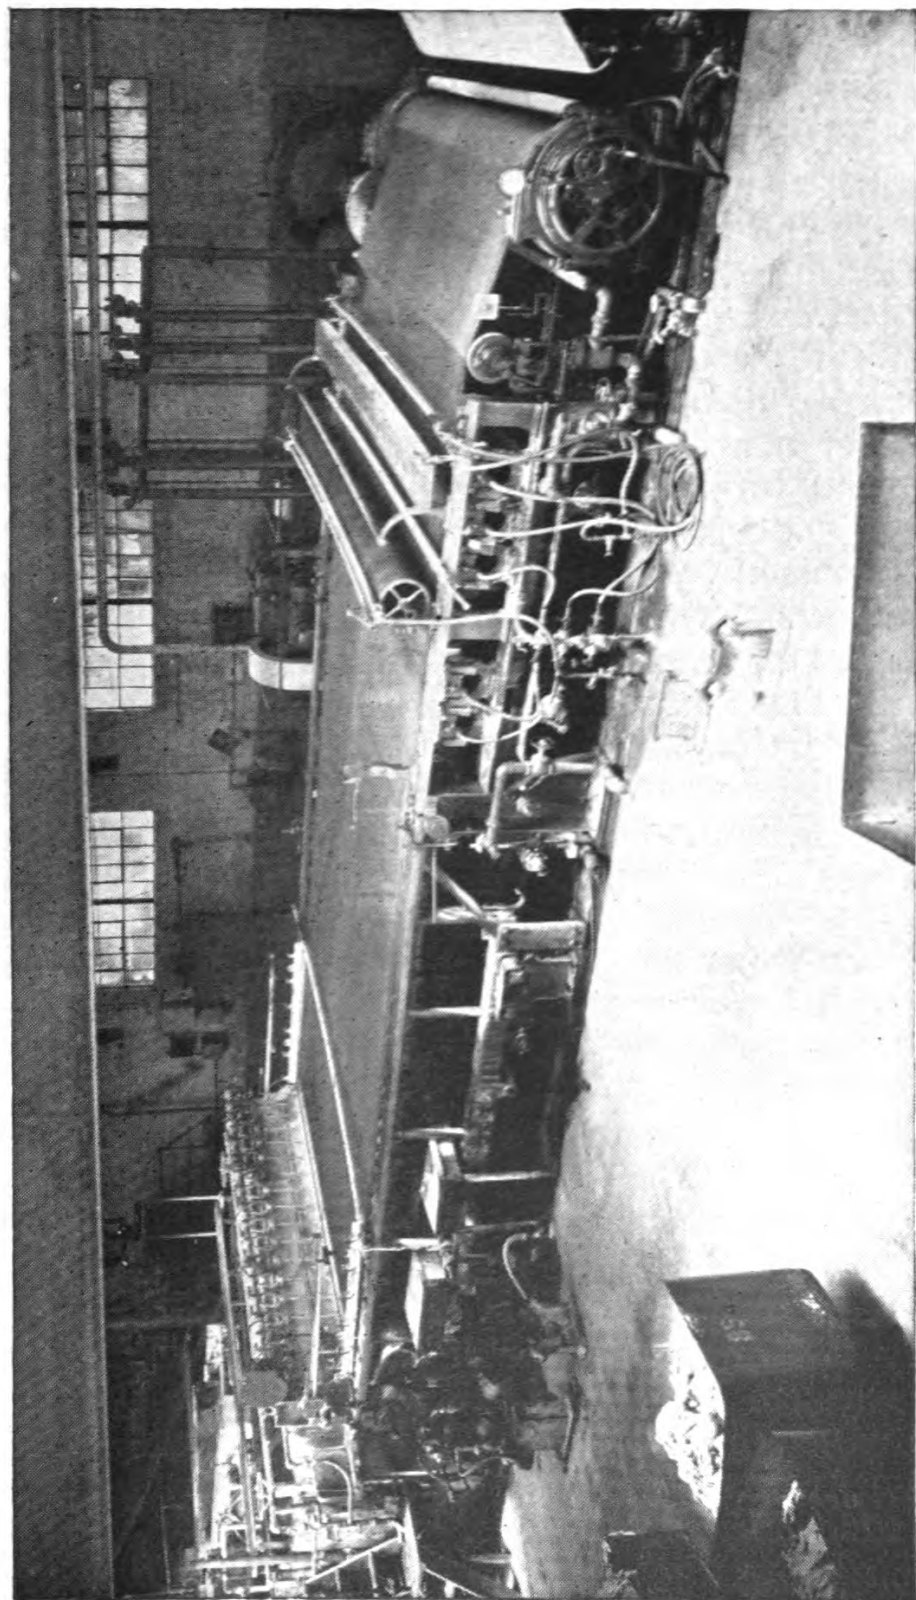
The "wet" end of a Fourdrinier paper-making machine.
